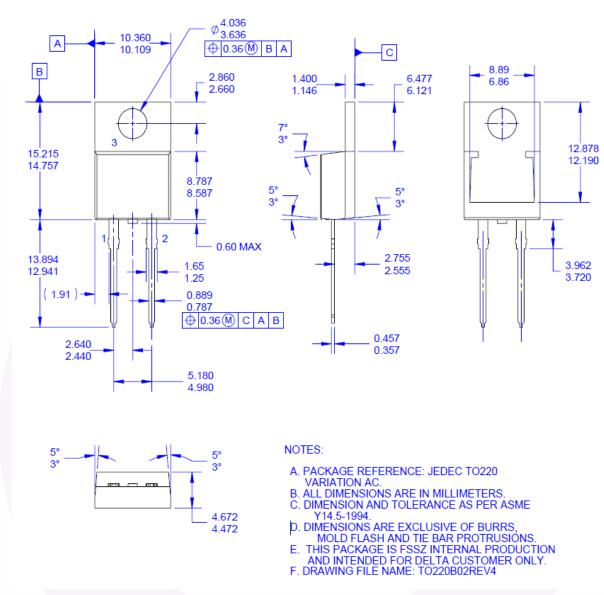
TO-220 2L - TO-220, MOLDED, 2LD
